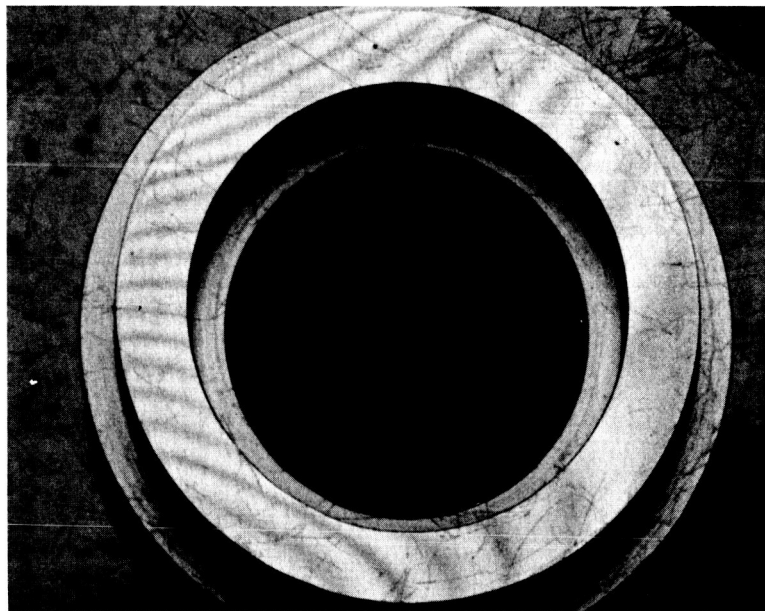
Lapmaster Interference Photo of Test Sample 1 After Electron Beam Weld.
